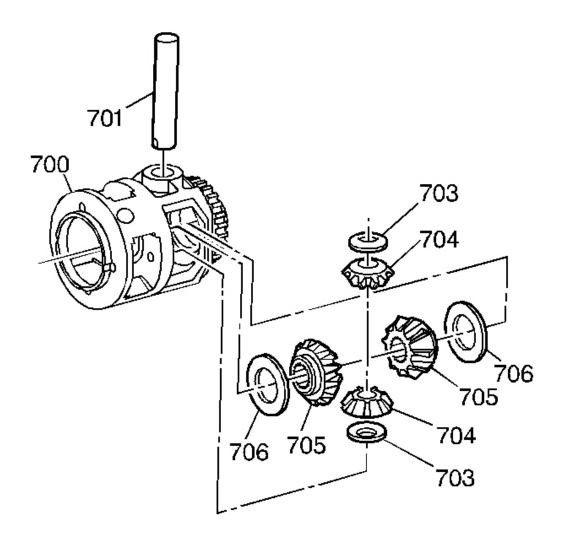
Expanded View Of Differential Carrier Assembly Courtesy of GENERAL MOTORS CORP.
